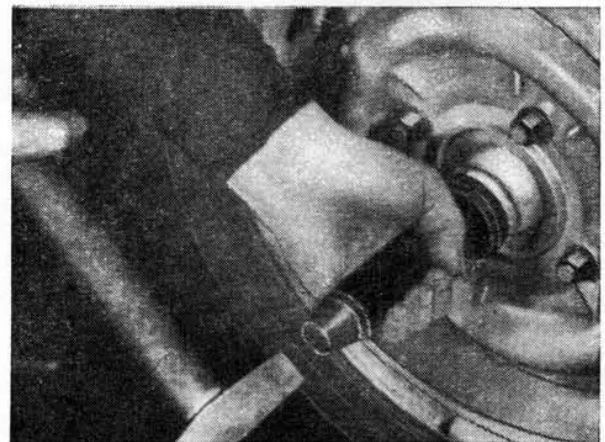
/11 - Driving-on Wheel Hub Cap Using MP 6-125 Drift
